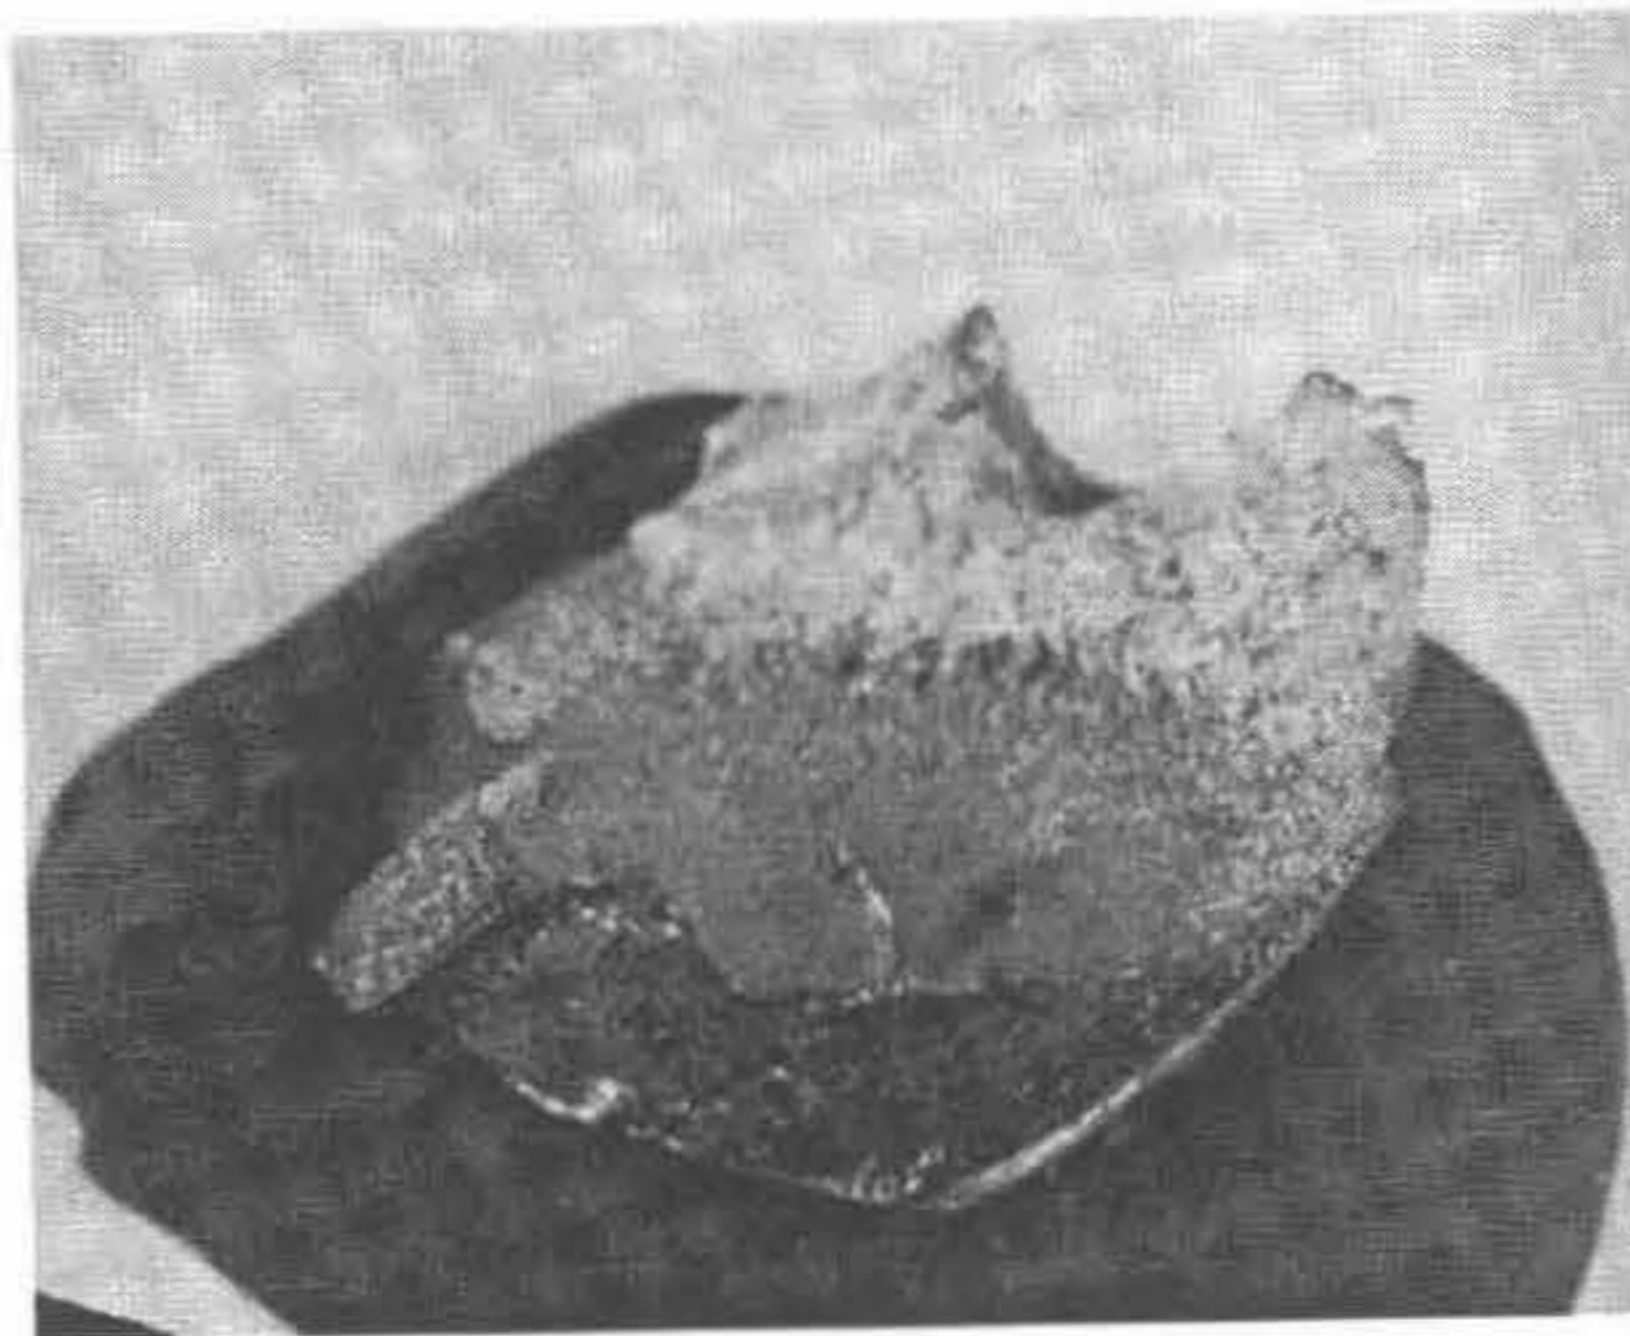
Fracture of cold-worked bar (after Tilly 1979)
